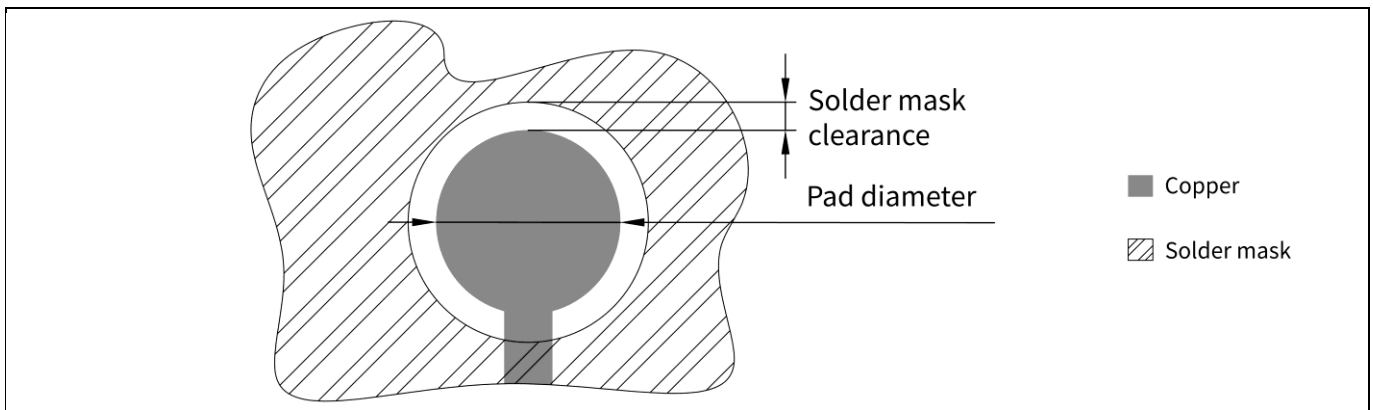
Recommended NSMD PCB pad design for BGA components. Pad diameter and solder-mask clearance depend on the individual components, and can be found in the Infineon package data base that is available on the Infineon web page [1].
